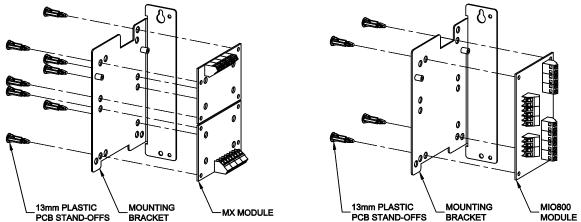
MX1 Loop Card/MX Module Mounting Bracket (FP1027) – Basic Assembly
